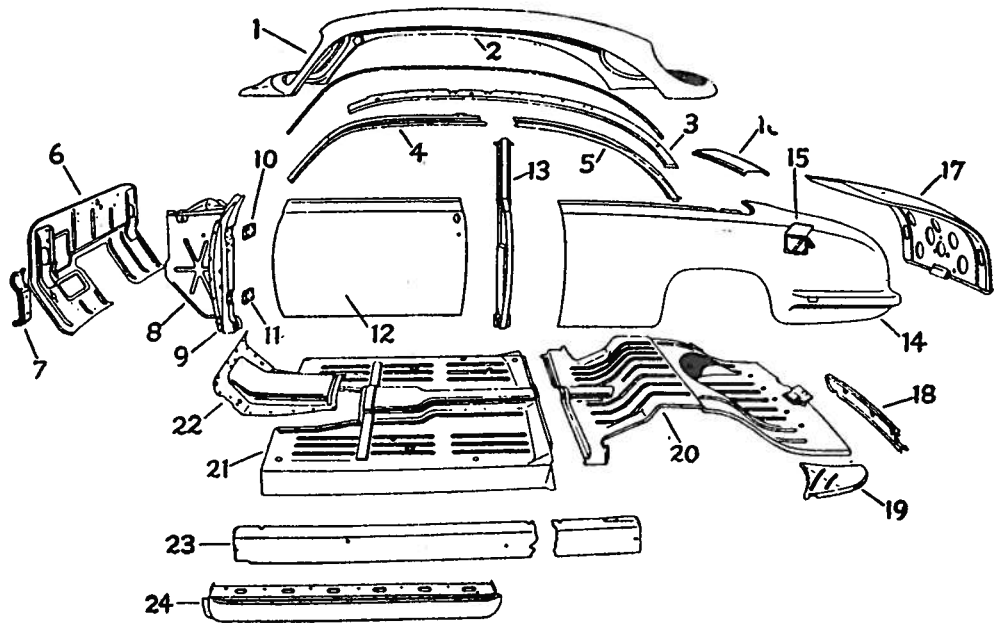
Sheet Metal & Fuel Tank—Body Type 72—Coupe
